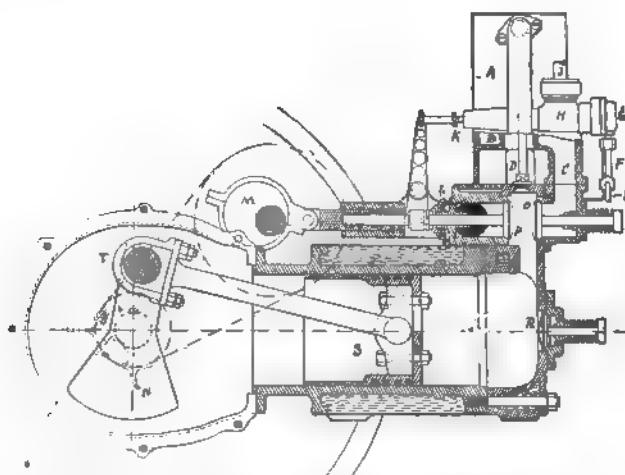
^a. Roots' Kerosene Oil Motor for Vehicle Use. Sectional views showing the hot tube ignition, oil, vapor and air inlet and reciprocating parts. A is the vaporizing chamber surrounding the chimney of the hot tube, D. The eccentric, M, on the cam shaft actuates the exhaust valve, P, held in place by the spring, L, at the same time moving the link, K, which opens a valve contained in H, allowing a small amount of oil to be sprayed through the tubes, E, F, G, into the circulating chambers contained around the hot tube, D, as shown at B. The oil circulating around the heated space is transformed into vapor, which is fed into the channel, C, behind the inlet valve, O, which is opened by compression of its spring at the suction stroke. The valve, R, controlled by an adjustable compression spring, also admits sufficient air into the cylinder to give a mixture of the required proportion. The reciprocating parts are the piston, S, the connecting rod joined by a strap, T, to the crank pin, opposite to which is the balance weight, N. This section very well illustrates the working of the type of explosive motor using hot tube ignition.
